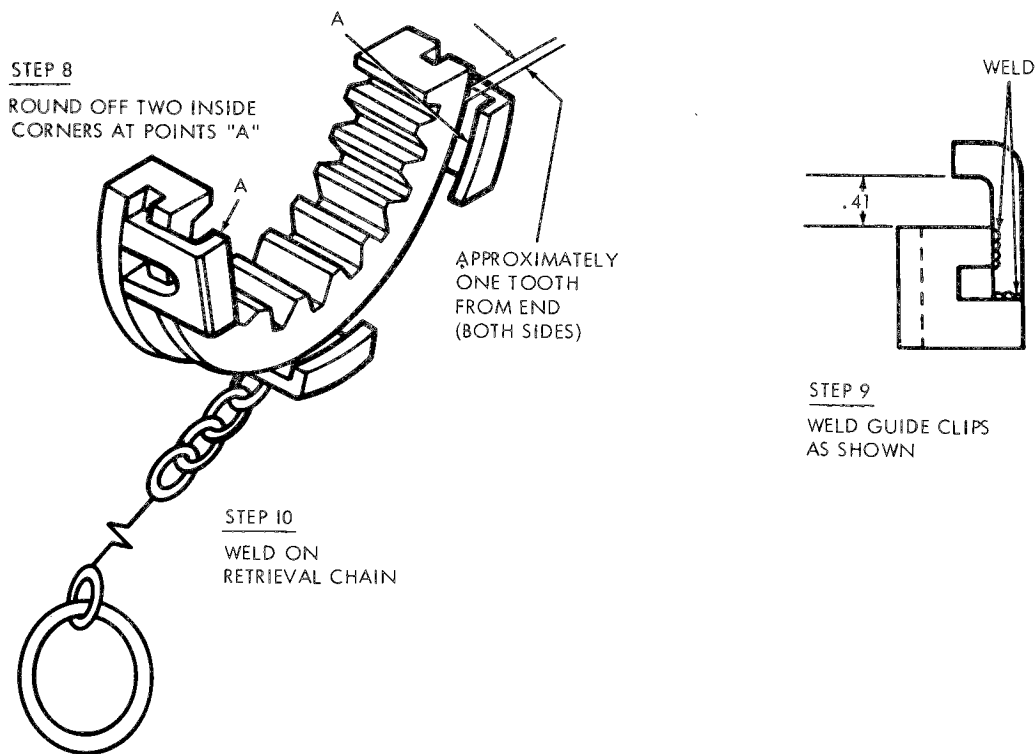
Final drive adapter hook-up tool (Sheet 2 of 2).
